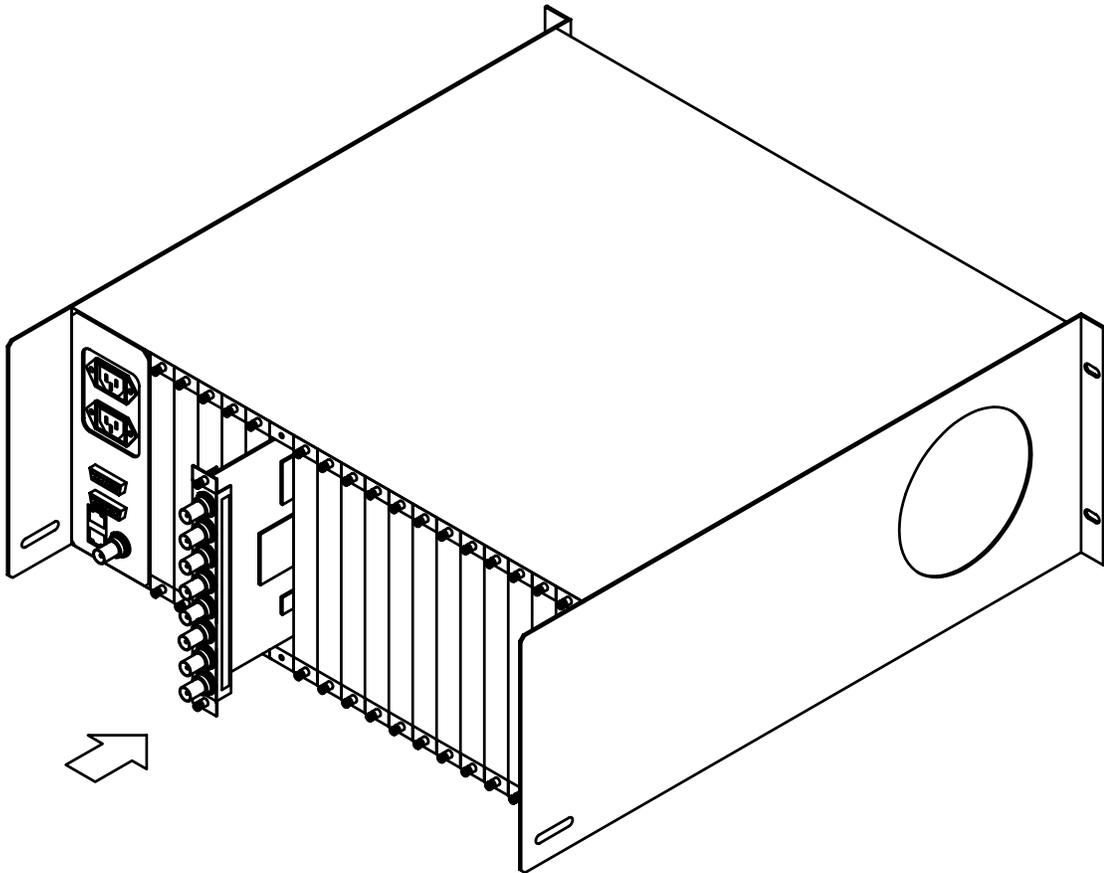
FRM-304 INTEGRITY SYSTEM FRAME CARD LOADING
